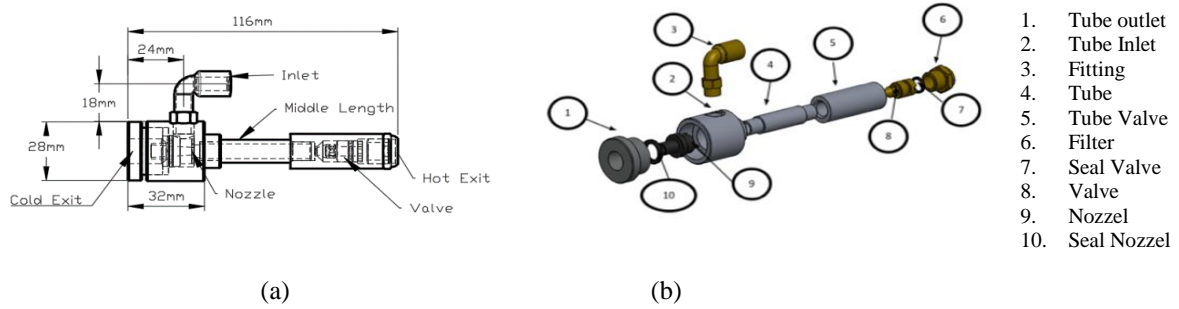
3D Model design and VT and Dimensions (a) dimension of VT, and; (b) components of VT
